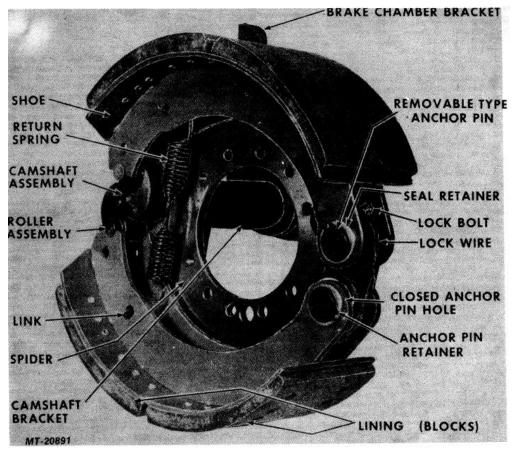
Typical Rear Axle Brake Group with Removable Anchor Pins
